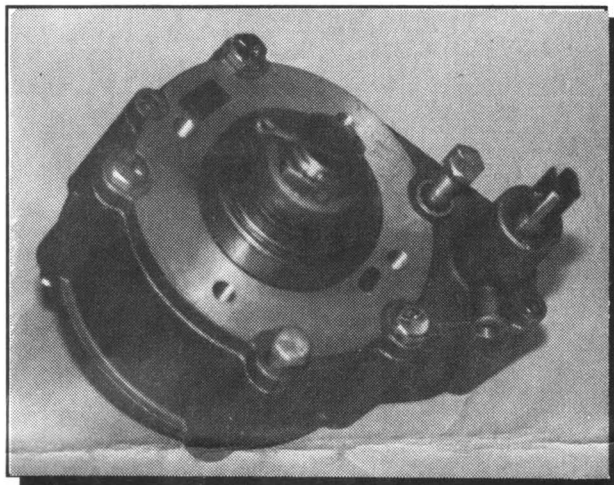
Remove the cotter pin locking the nut to the spline shaft.
